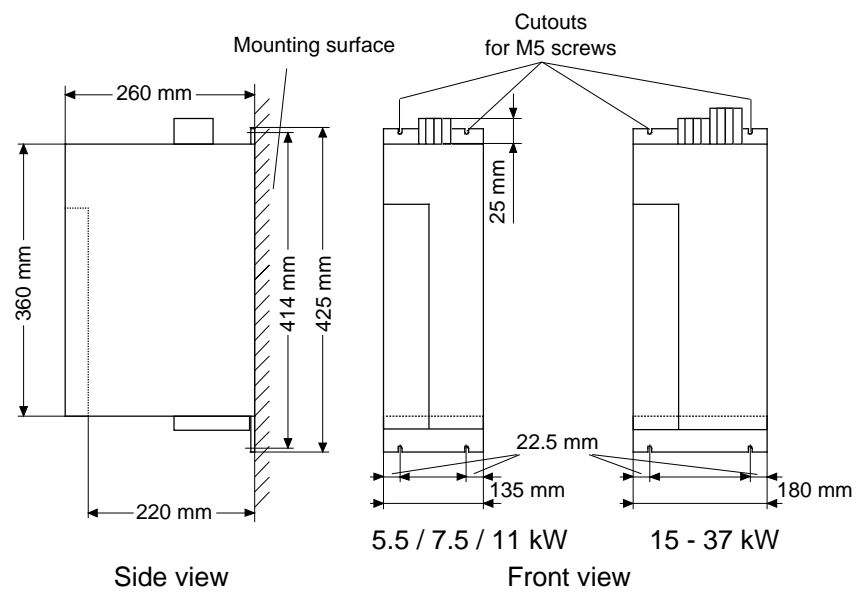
Dimension drawings for housings 135 mm and 180 mm wide
